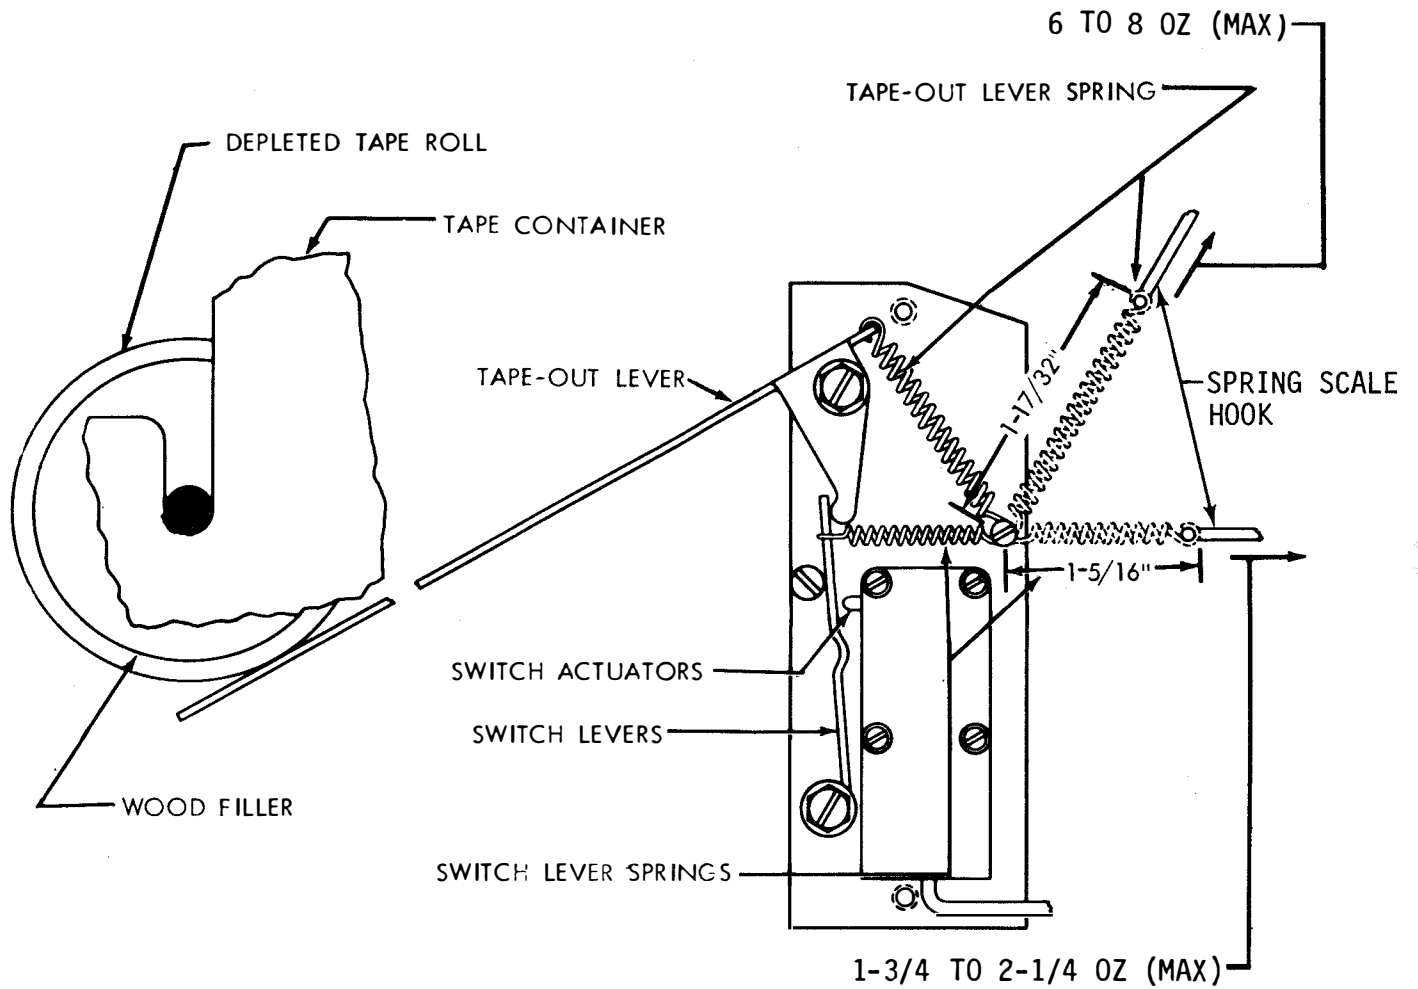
Switch Lever Springs, Tape-Out Lever and Tape-Out Lever Spring - Right Side View
